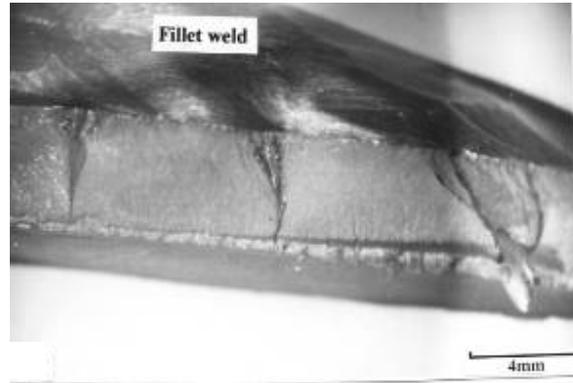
Stereoscopic photograph of cracked surface showing brittle appearance and multiple initiation sites for fracture.
